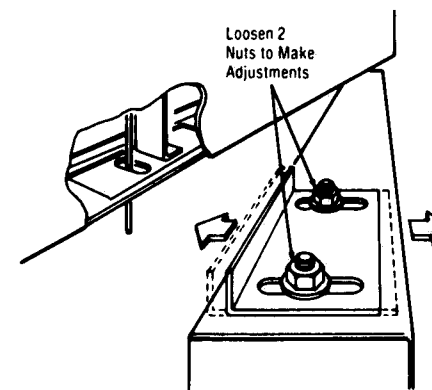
DOOR SWITCH ADJUSTMENT.
